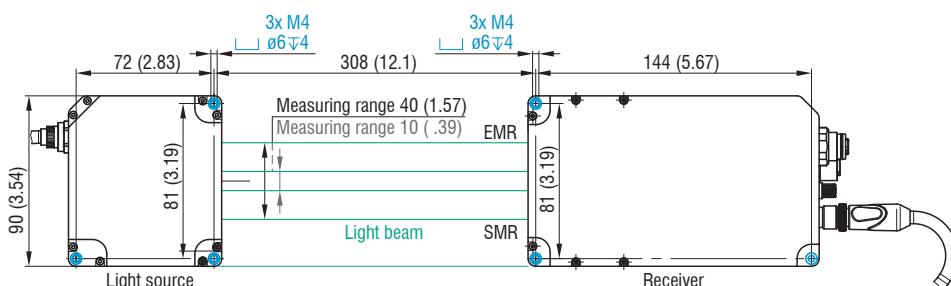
Mounting thread for direct fastening ODC2700-10, ODC2700-40, dimensions in mm
